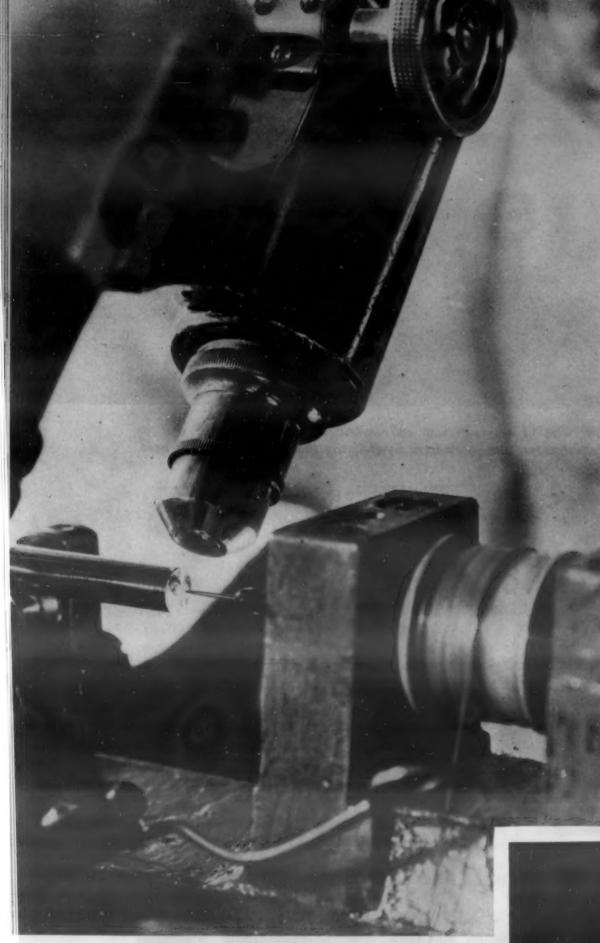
To make the opening between cone and back relief, the diamond is mounted on a gently oscillating spindle and is observed under a microscope to prevent a breakthrough with consequent damage to the bearing surface. The needle is ground to a blunt round point and the operation continues until there is a clean countersunk exit between the bearing and the back relief.
